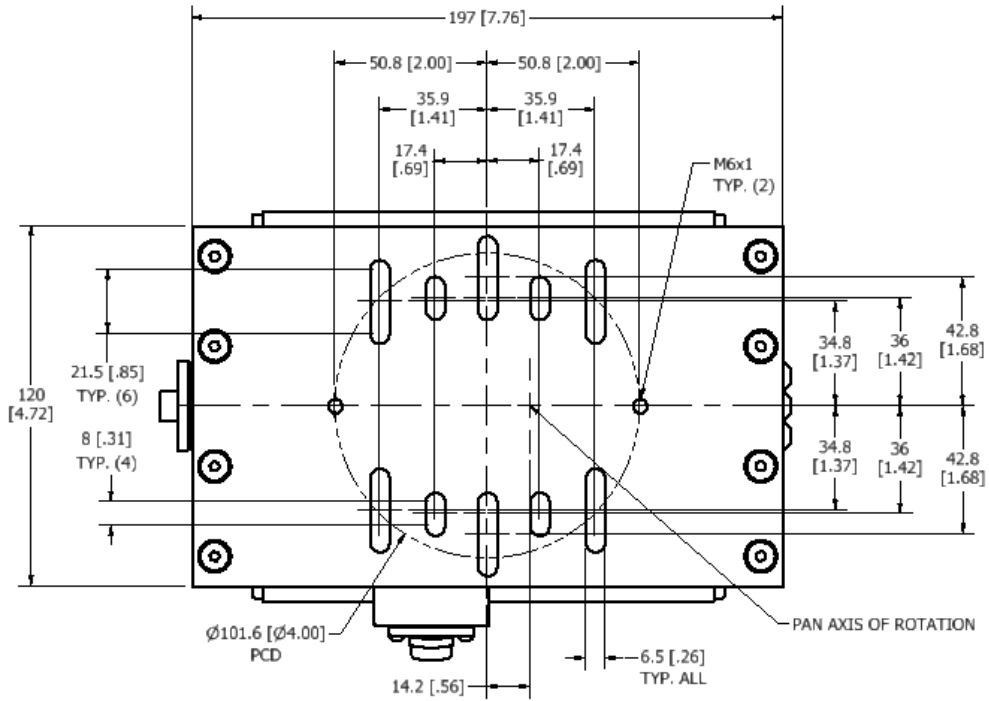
AP-30 OTT - Payload Mounting Pattern
